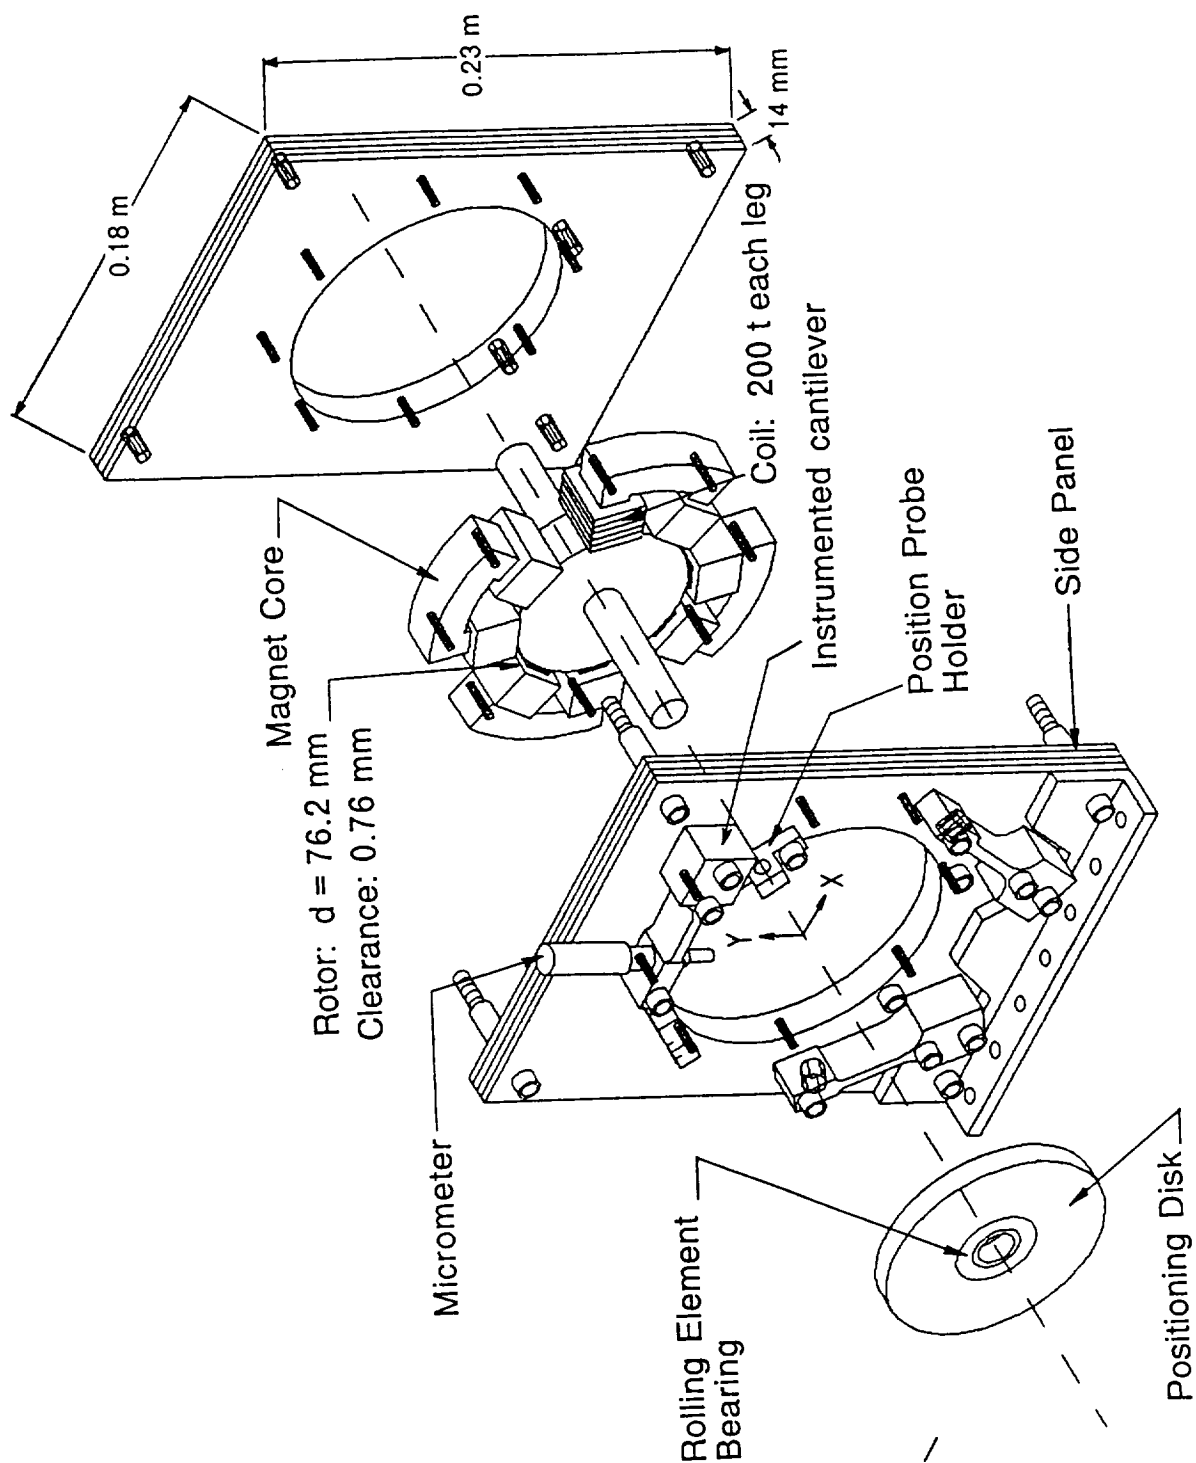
Assembly drawing of experimental apparatus I.
